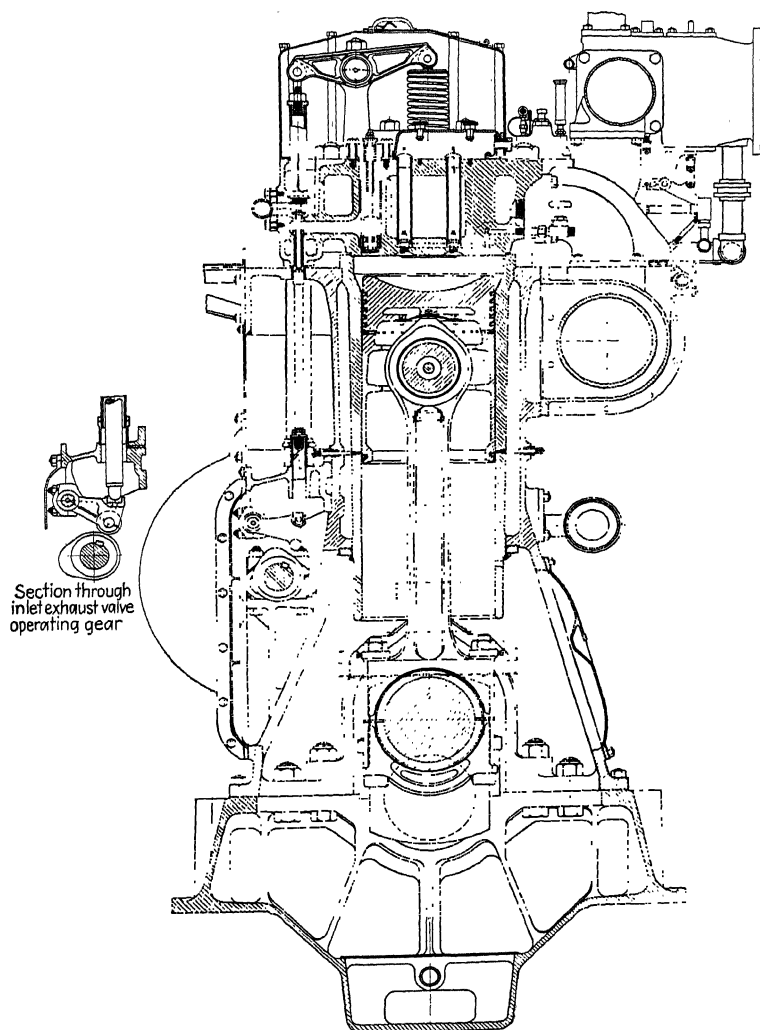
Sectional view of Worthington Type EEG gas engine. (Courtesy of Worthington Pump and Machinery Corporation.)
